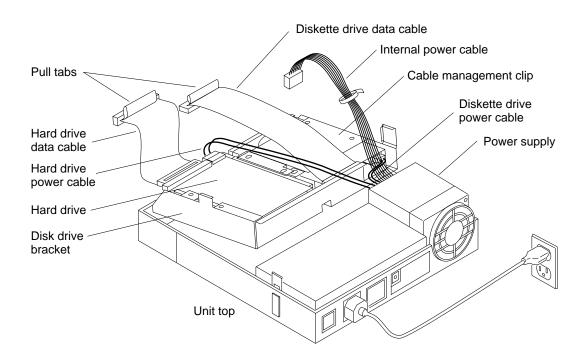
Removing and Replacing the Disk Drive Mounting Bracket
